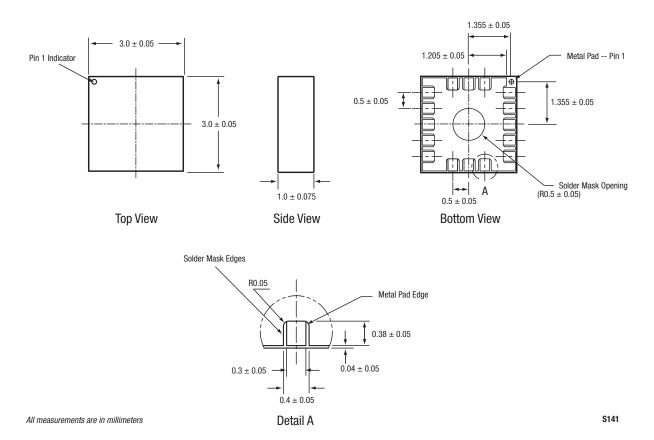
SKY74092-11 16-Pin LGA Package Dimensions
